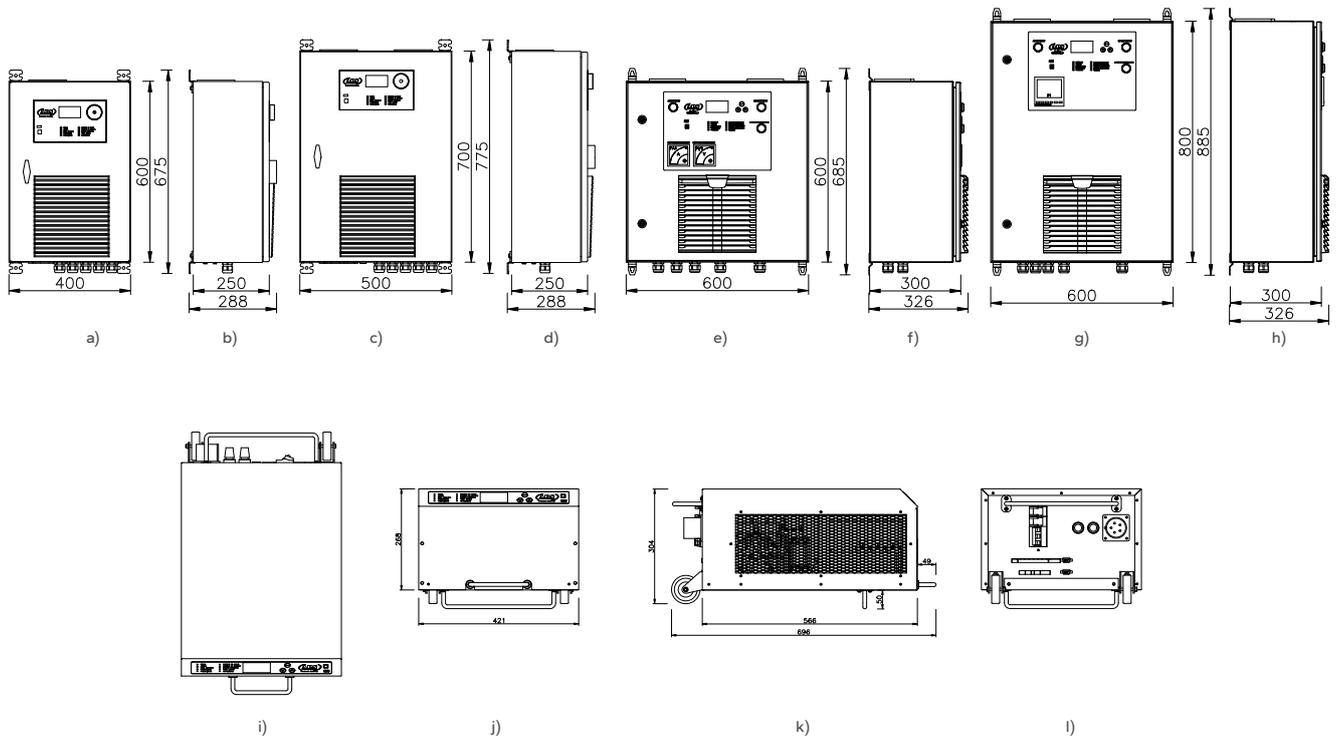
Views with the dimensions of the PBI type rectifier compact (wall-mounted and portable enclosure):
